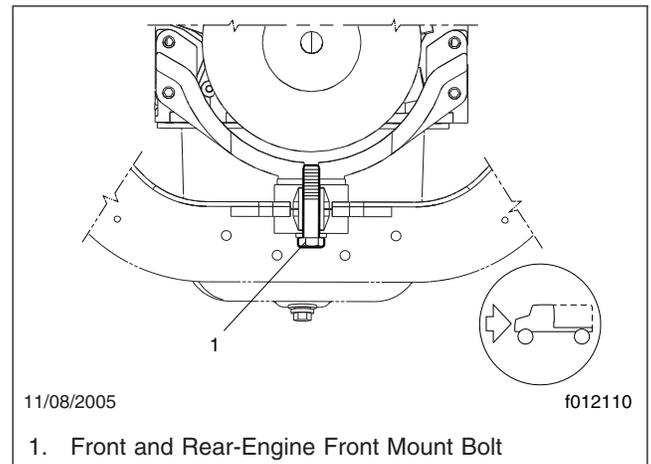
, Front and Rear-Engine Front Mount (ISB chassis built after 2002)
